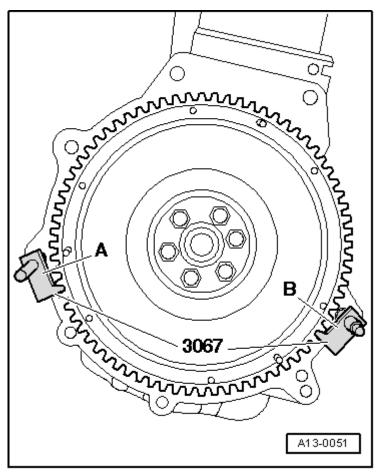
Identifying Dual-Mass Flywheel & Bolts Courtesy of AUDI OF AMERICA, LLC
